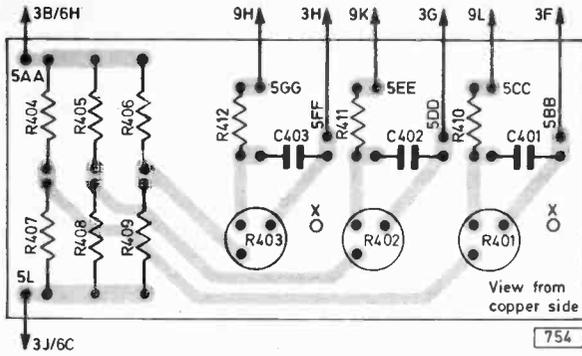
The small board used by E. Erven to mount the RGB drive controls: drill $\frac{1}{8}$ in. holes in the positions marked X to secure the board to two of the RGB output transistor heatsinks—ensure that the board is insulated from the heatsinks. Shown half scale (viewed from the copper strip side).
